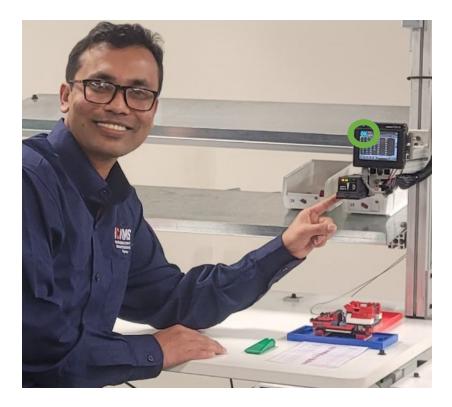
Researcher Monir Hossain demonstrating the "OK" output when all the parts on the top of the workpiece under the Machine Vision system are correct.
